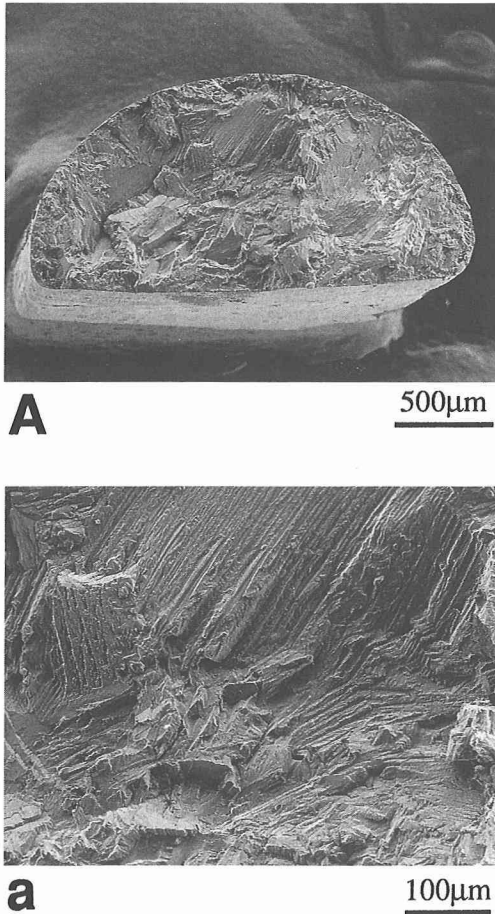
Scanning electron micrograph photos of fractured surface of welded specimen after fatigue test. (Unwelded portion)
